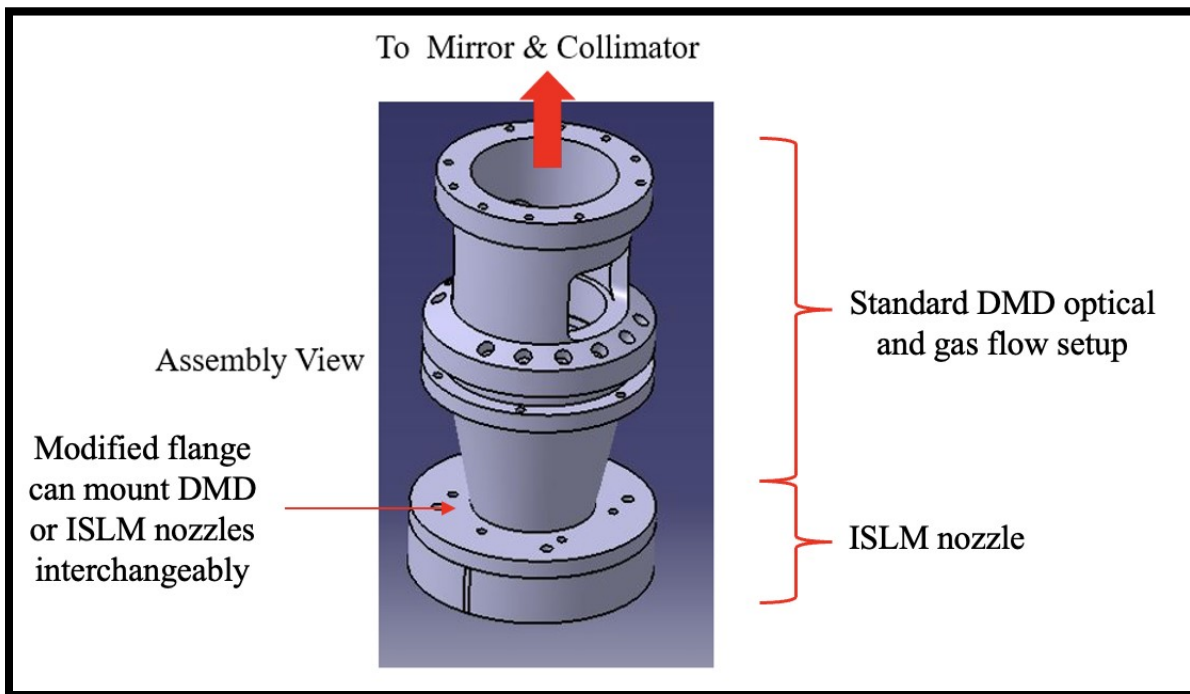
Assembly design view of the DMD ISLM nozzle setup
